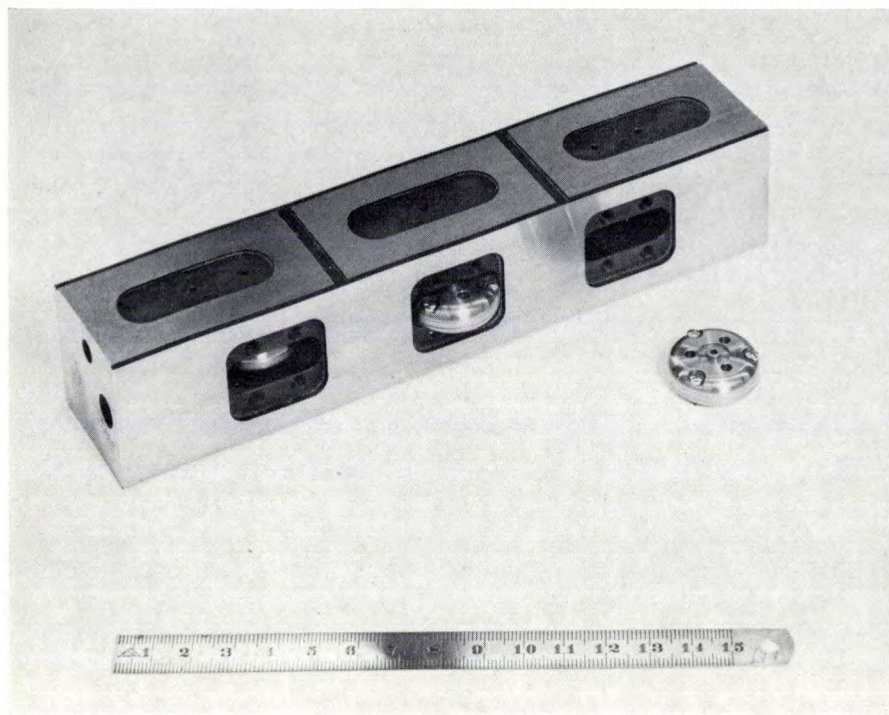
A bearing block of the carriage with three pairs of hydrostatic-bearing recesses. Each pair has an M.D.R., which is located in a groove of the bearing block.
